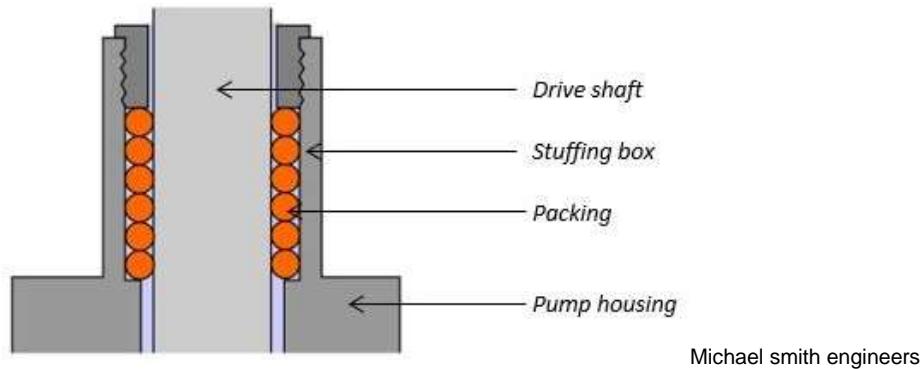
SHOWING A TYPICAL STUFFING BOX SHAFT SEAL LAYOUT.
